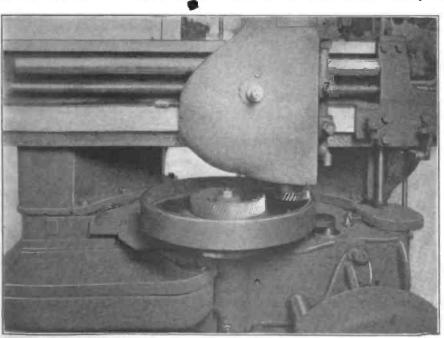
The gear shaper is capable of cutting internal or external helical gear teeth with the same cutter
